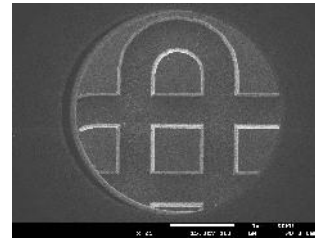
Processed fluidic channel model on the Polycarbonate surface using CNC Engraving Machine
